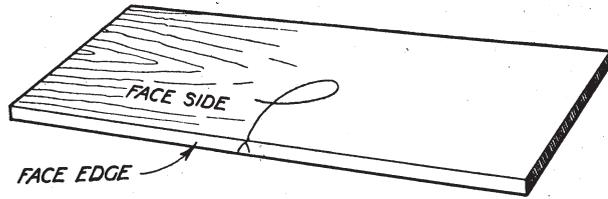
HOW FACE SIDE AND FACE EDGE ARE MARKED
